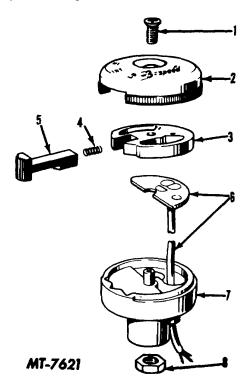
Type "A" Control Switch (Exploded View) Legend for Fig. 19
